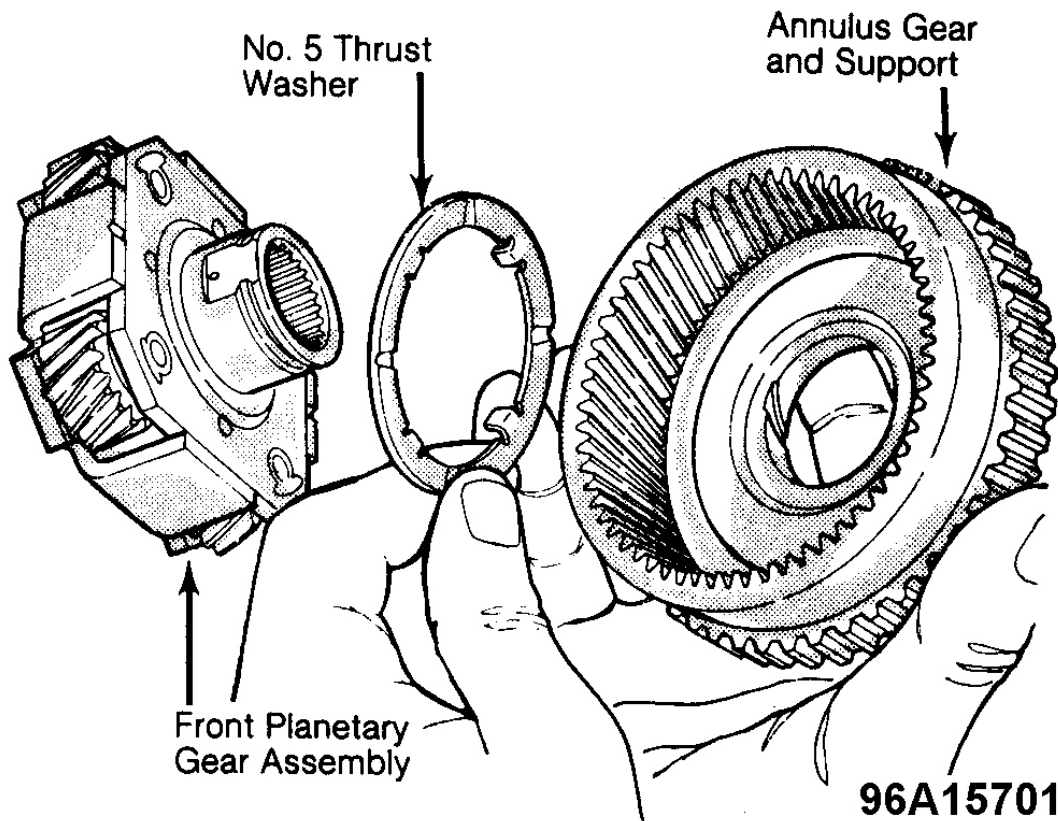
Removing Front Planetary Gear & No. 5 Thrust Washer From Annulus Gear
